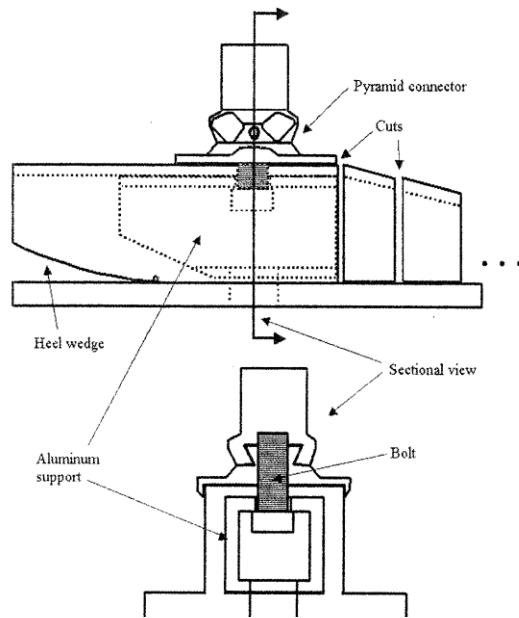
Aluminum Insert Piece and Attachment Point (Sam et al., 299)
